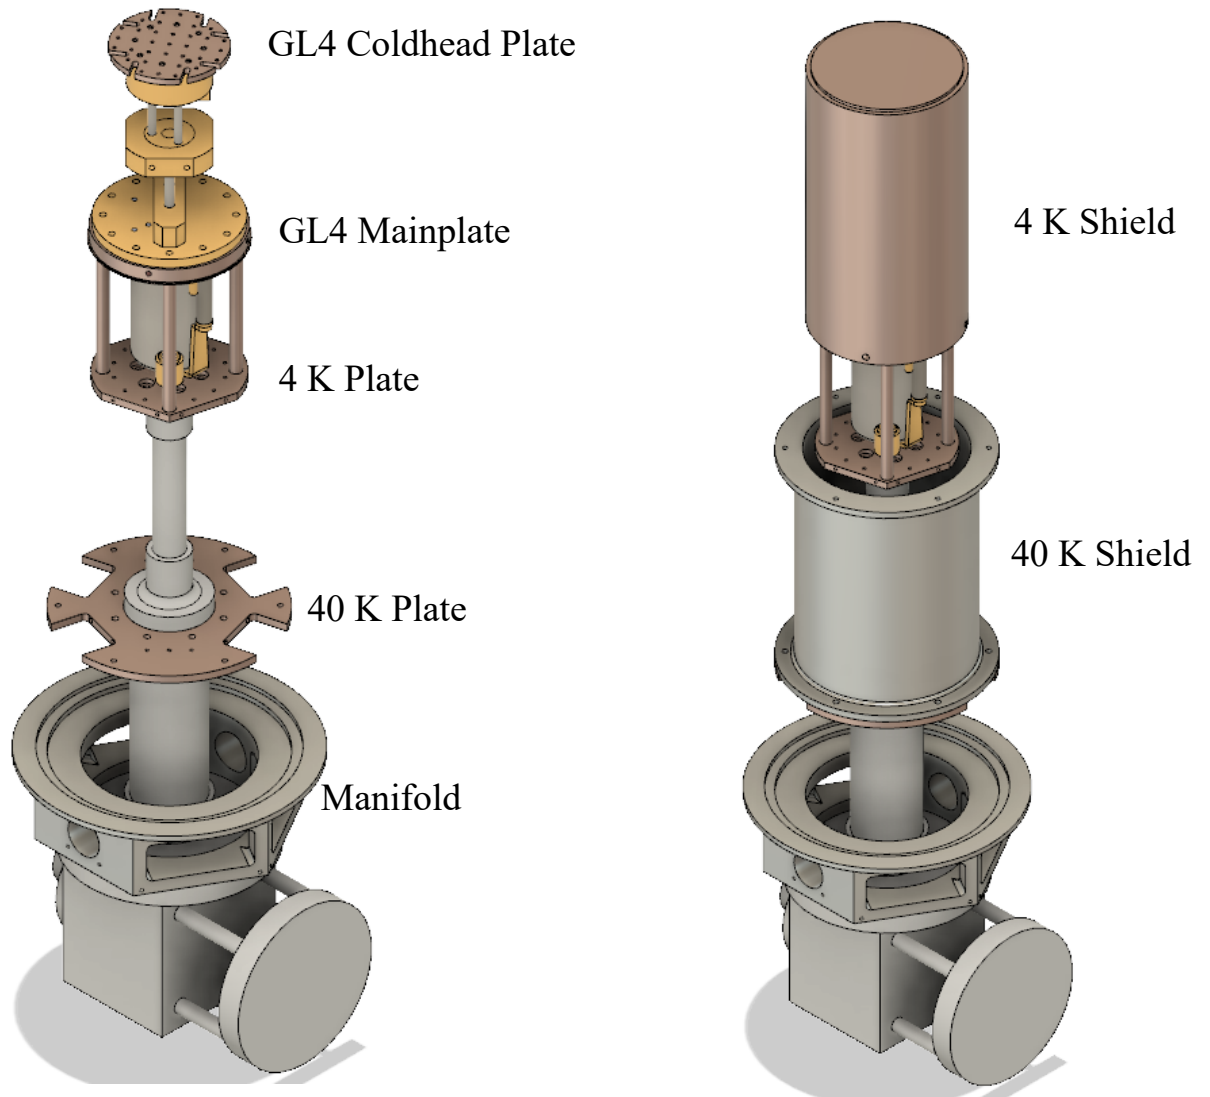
Left: GL4 interfaced with an RDK 101D showing the custom copper pieces. Right: Showing the two layers of radiation shielding. The assembly is orientated pointing upwards during assembly and device loading and inverted (with the GL4 at the bottom) for operation.
